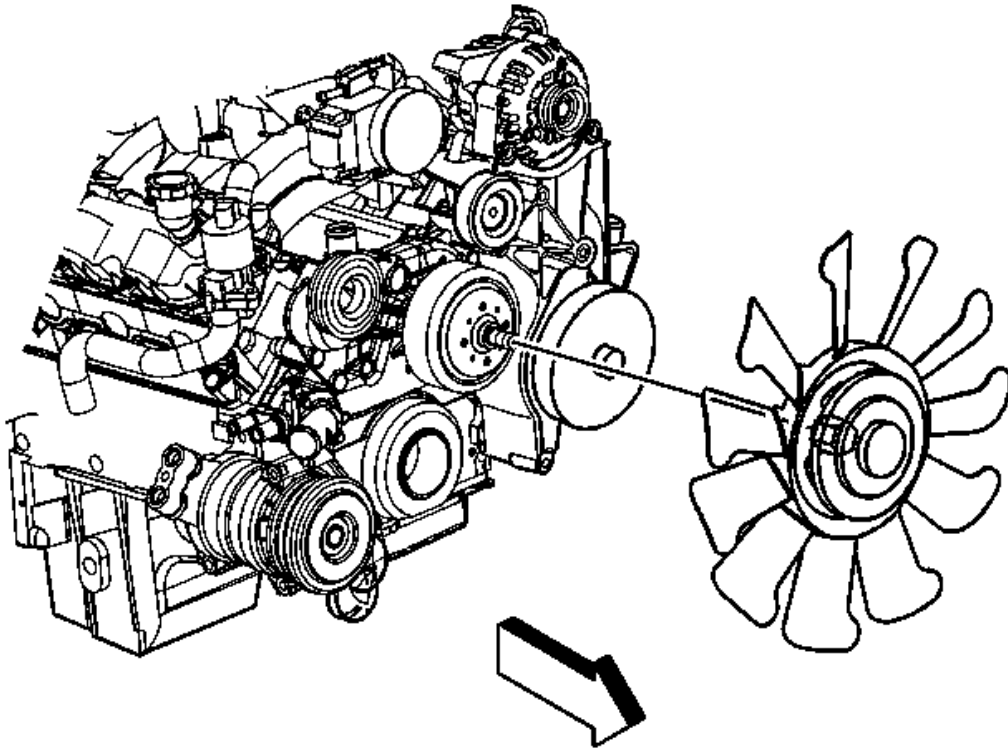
View Of Fan Blade & Fan Clutch
